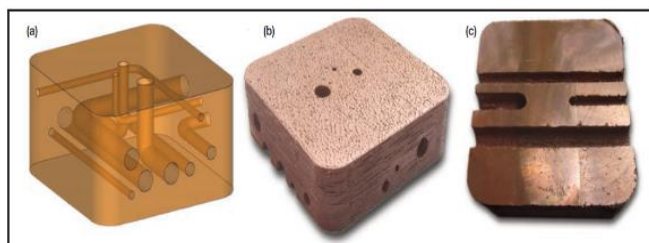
3D CAD model of the cooling channel test block shows internal cooling channel geometry (a); photographs of the sectioned EBM-fabricated test blocks show cooling channels of 1.5, 4, and 7 mm in diameter (b and c) [46].
